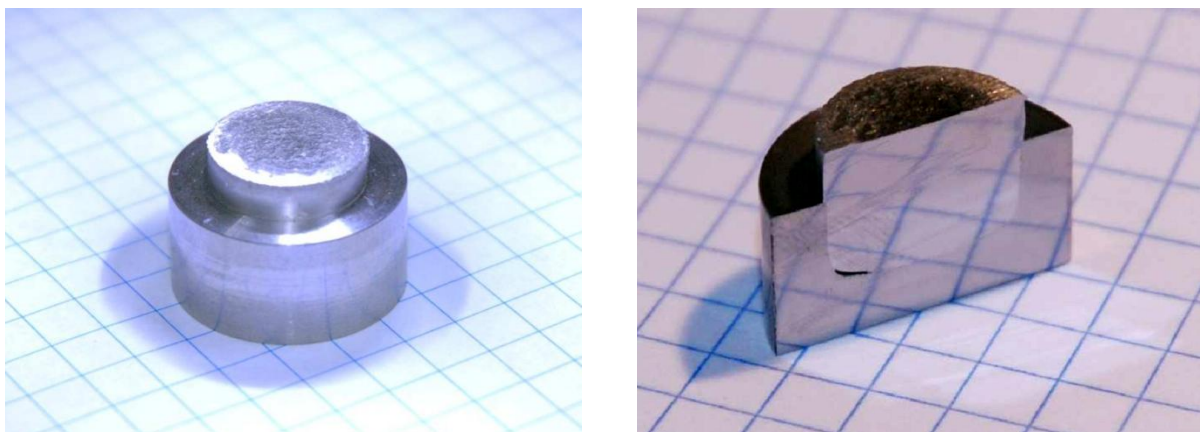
Macroscopic images of a welded WL10/Eurofer 97 joint
